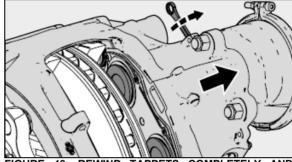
REWIND TAPPETS COMPLETELY AND PUSH CALIPER IN DIRECTION OF MIDDLE OF VIEW
